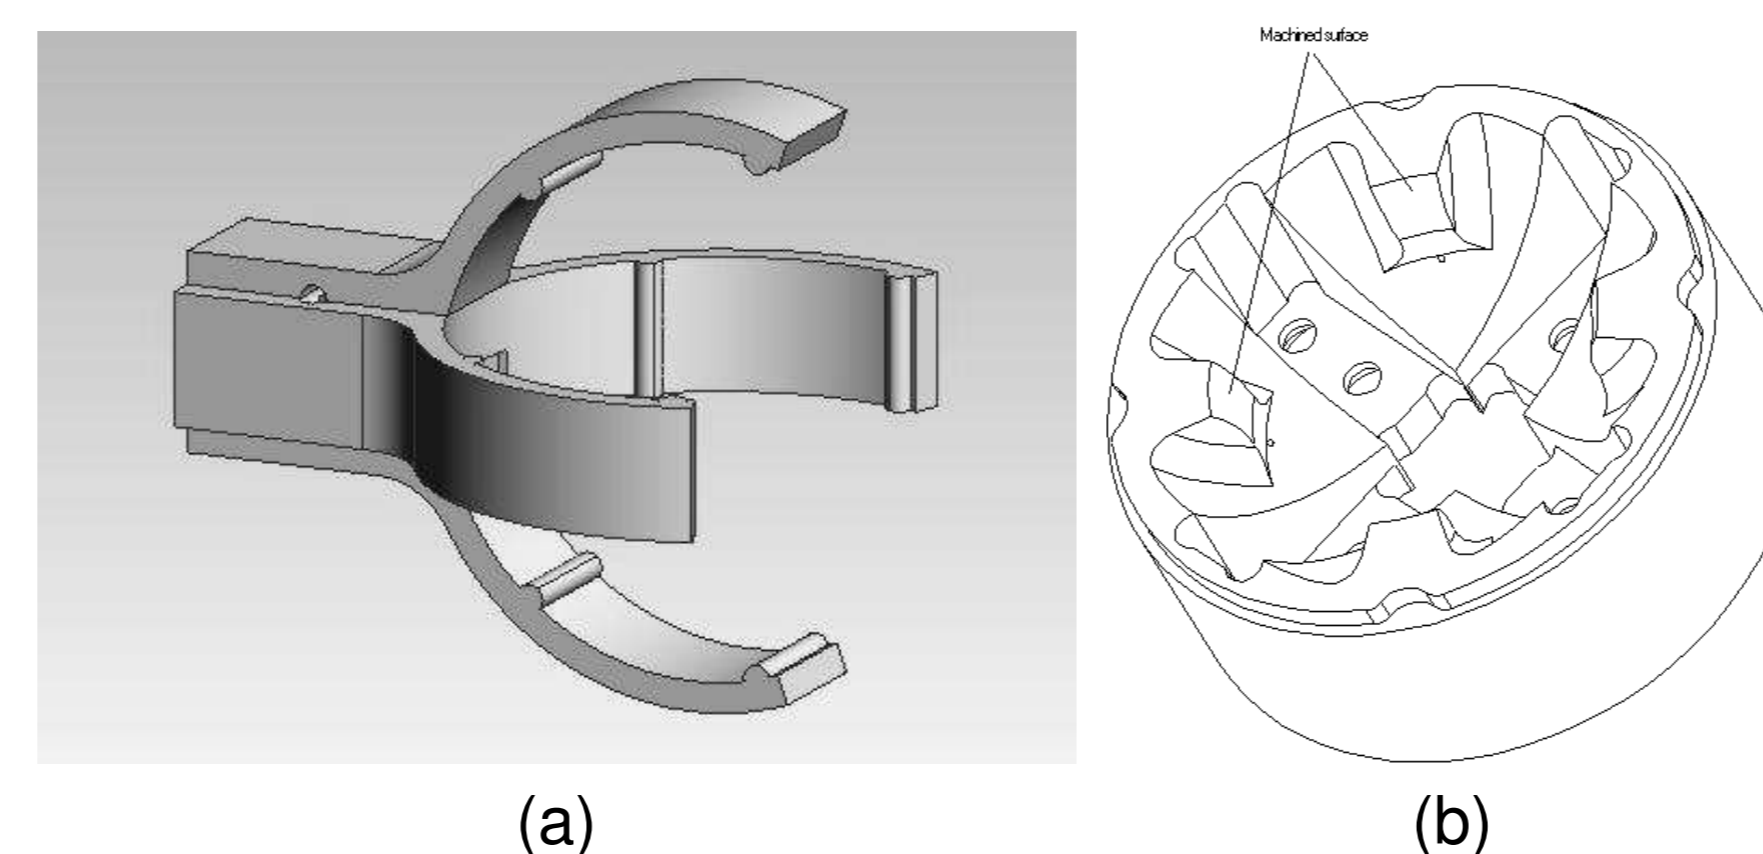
(a) CAD model of the eye-ball support; (b) detail of the flange supporting the eye-ball.
